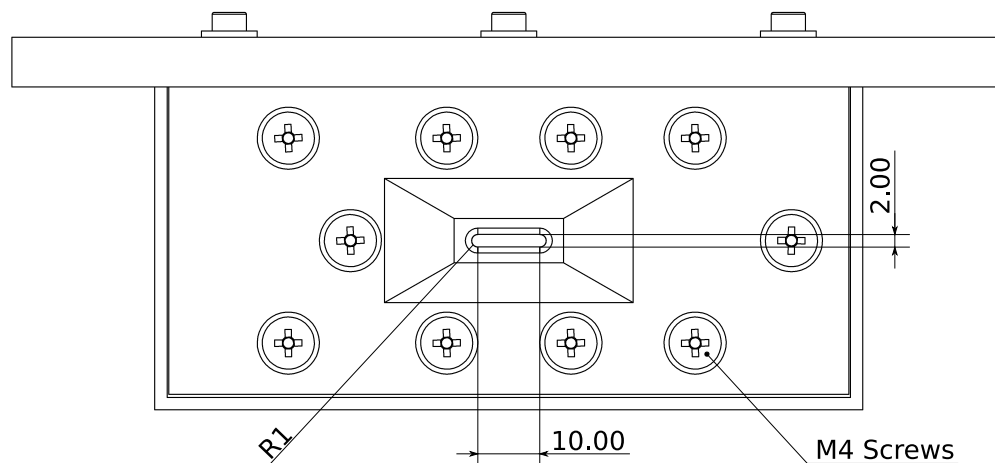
Drawing of the working electrode holder with dimensions of the open area.
